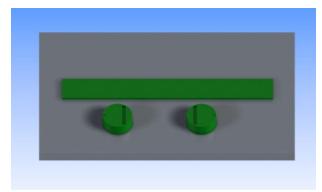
Electronics Sled Pieces . The first version of the electronics sled was printed and looked like this. The final pieces will be shaped similarly but will be different materials
